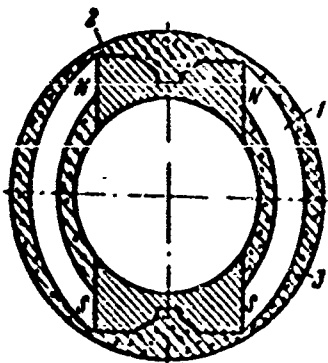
Two-pole rotor with pole pieces. 1) Magnet; 2) pole piece; 3) aluminum covering.
